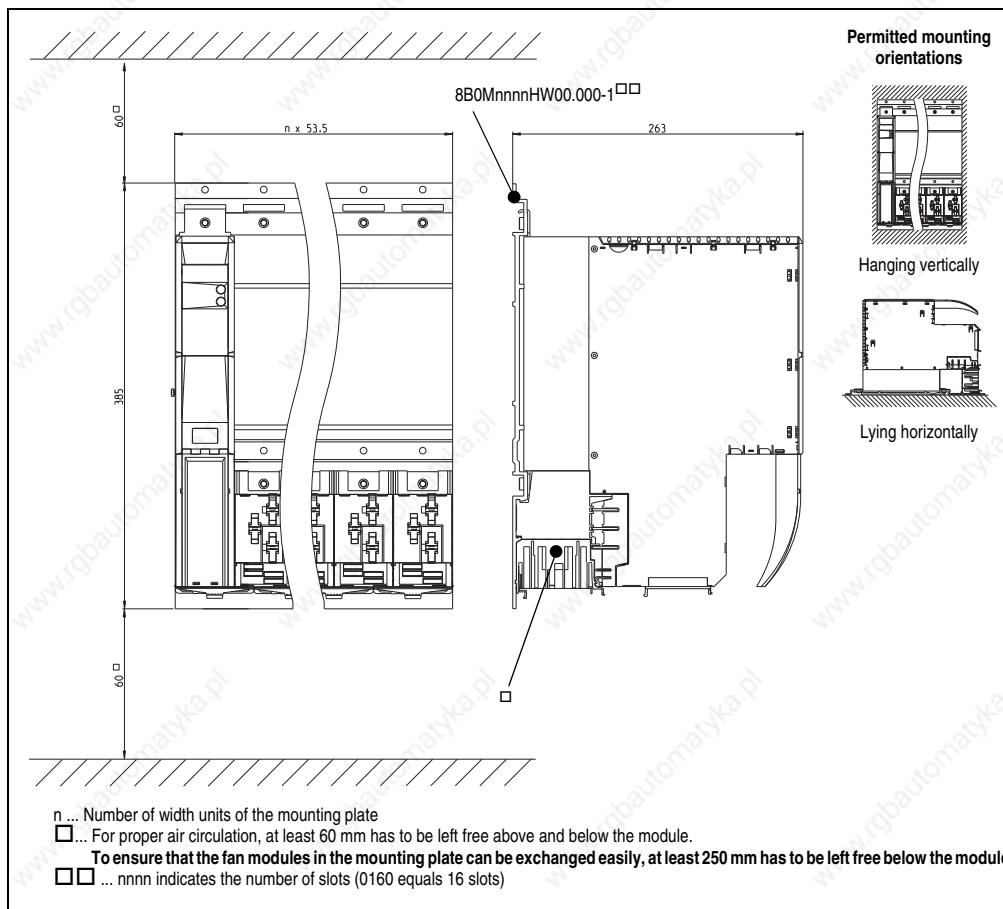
Dimension diagram and installation dimensions for 8B0K1650HW00.000-1
